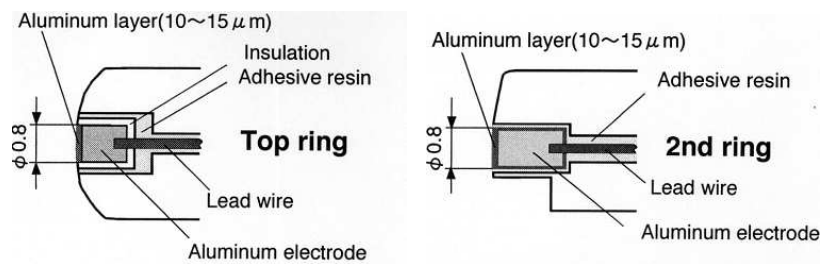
Sectional view of the typical ring electrodes from [60]
